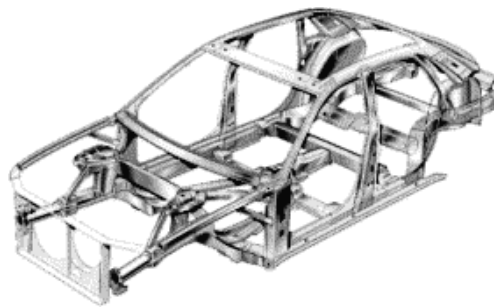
Space frame, an assembly of various rolled, extruded and high-pressure die cast components.
